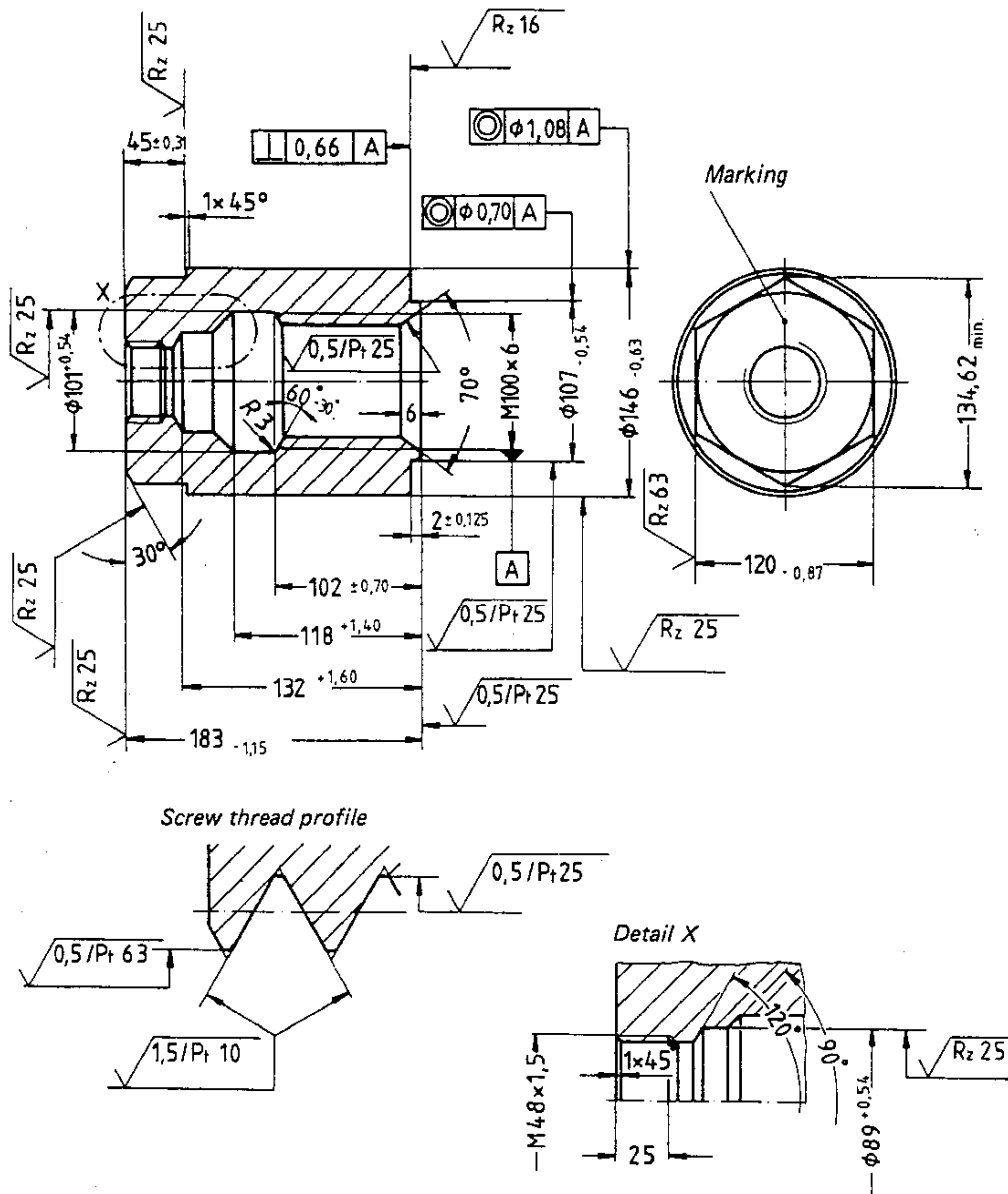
The reference element for A is the nominal screw thread diameter, the take up is effected at the thread flank
